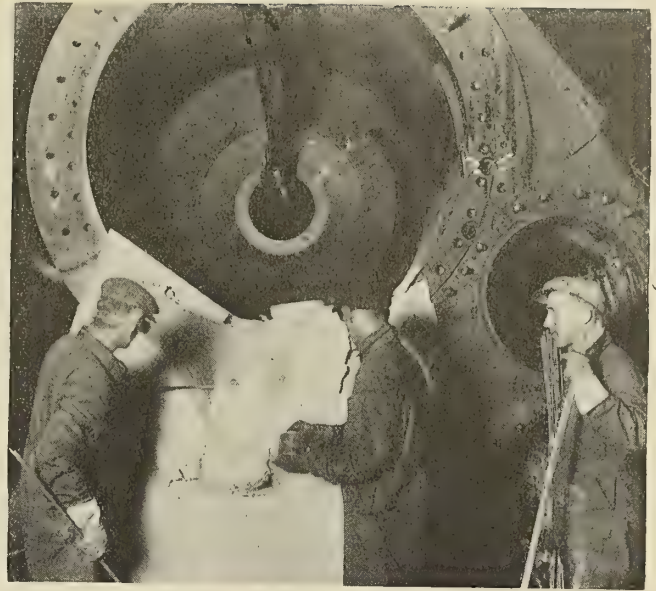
Welding the Low-Pressure Cylinder. Asbestos Paper Used to Protect Workers and Retain Heat from Preheating Fire. Extra Long Blow-Pipes and Rods Required for Welding Up the Long Cracks
